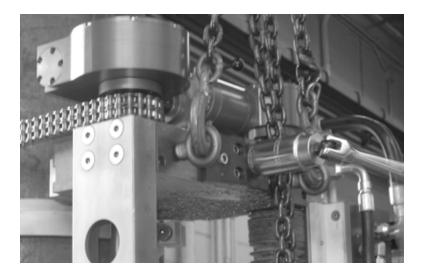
Tighten the tensioning nut until the chain is snug.
